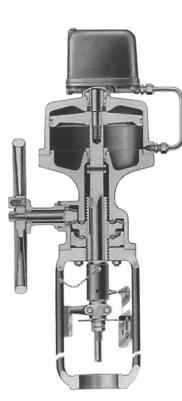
Cylinder actuator with bevel geared handwheel and shear pin torque limiter
